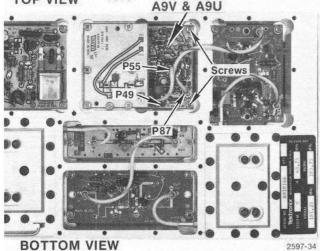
Removing the VHF and UHF VCO Amp boards, A9V and A9U.
